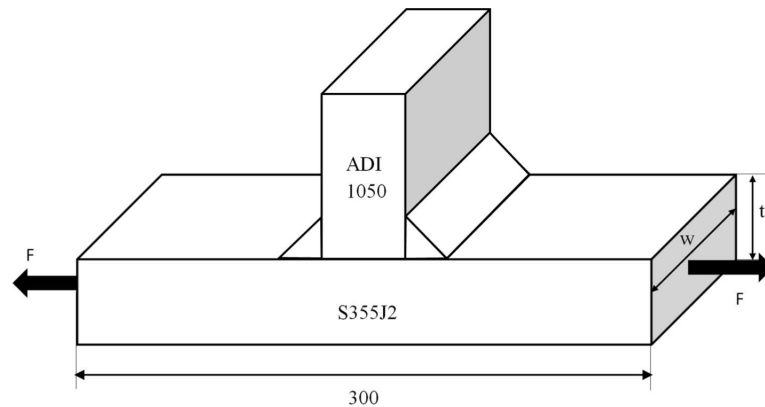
Geometry of the T nlc fillet welded joints under axial load [66].
